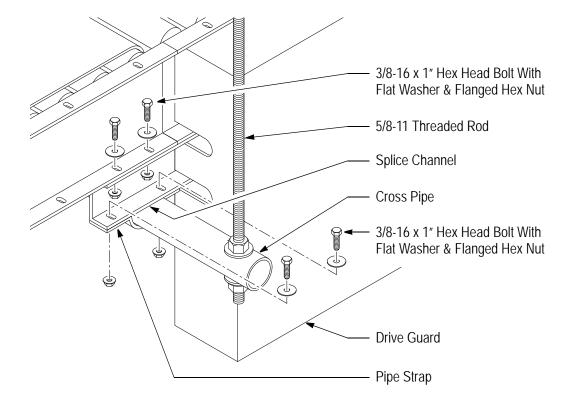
Installing a Ceiling Hanger Offset from a Section Joint
